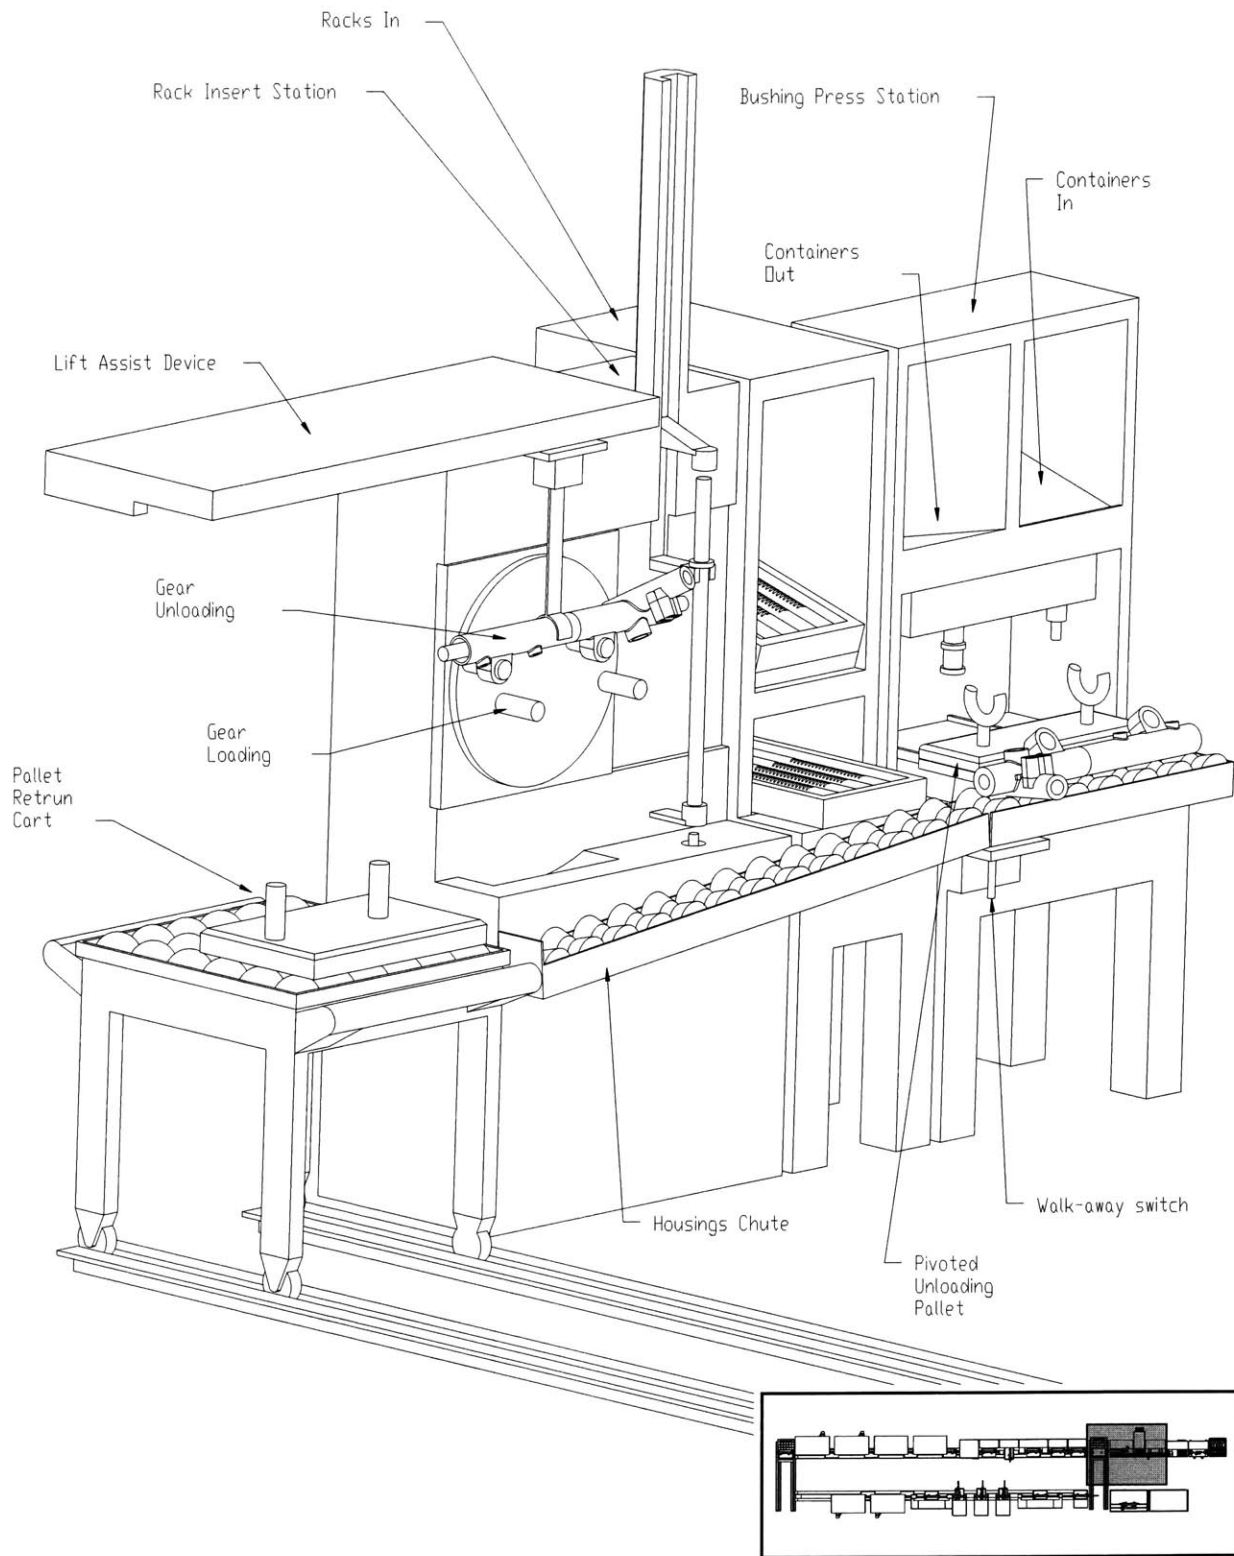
Detail View of Stations from the U-222 Assembly Cell
